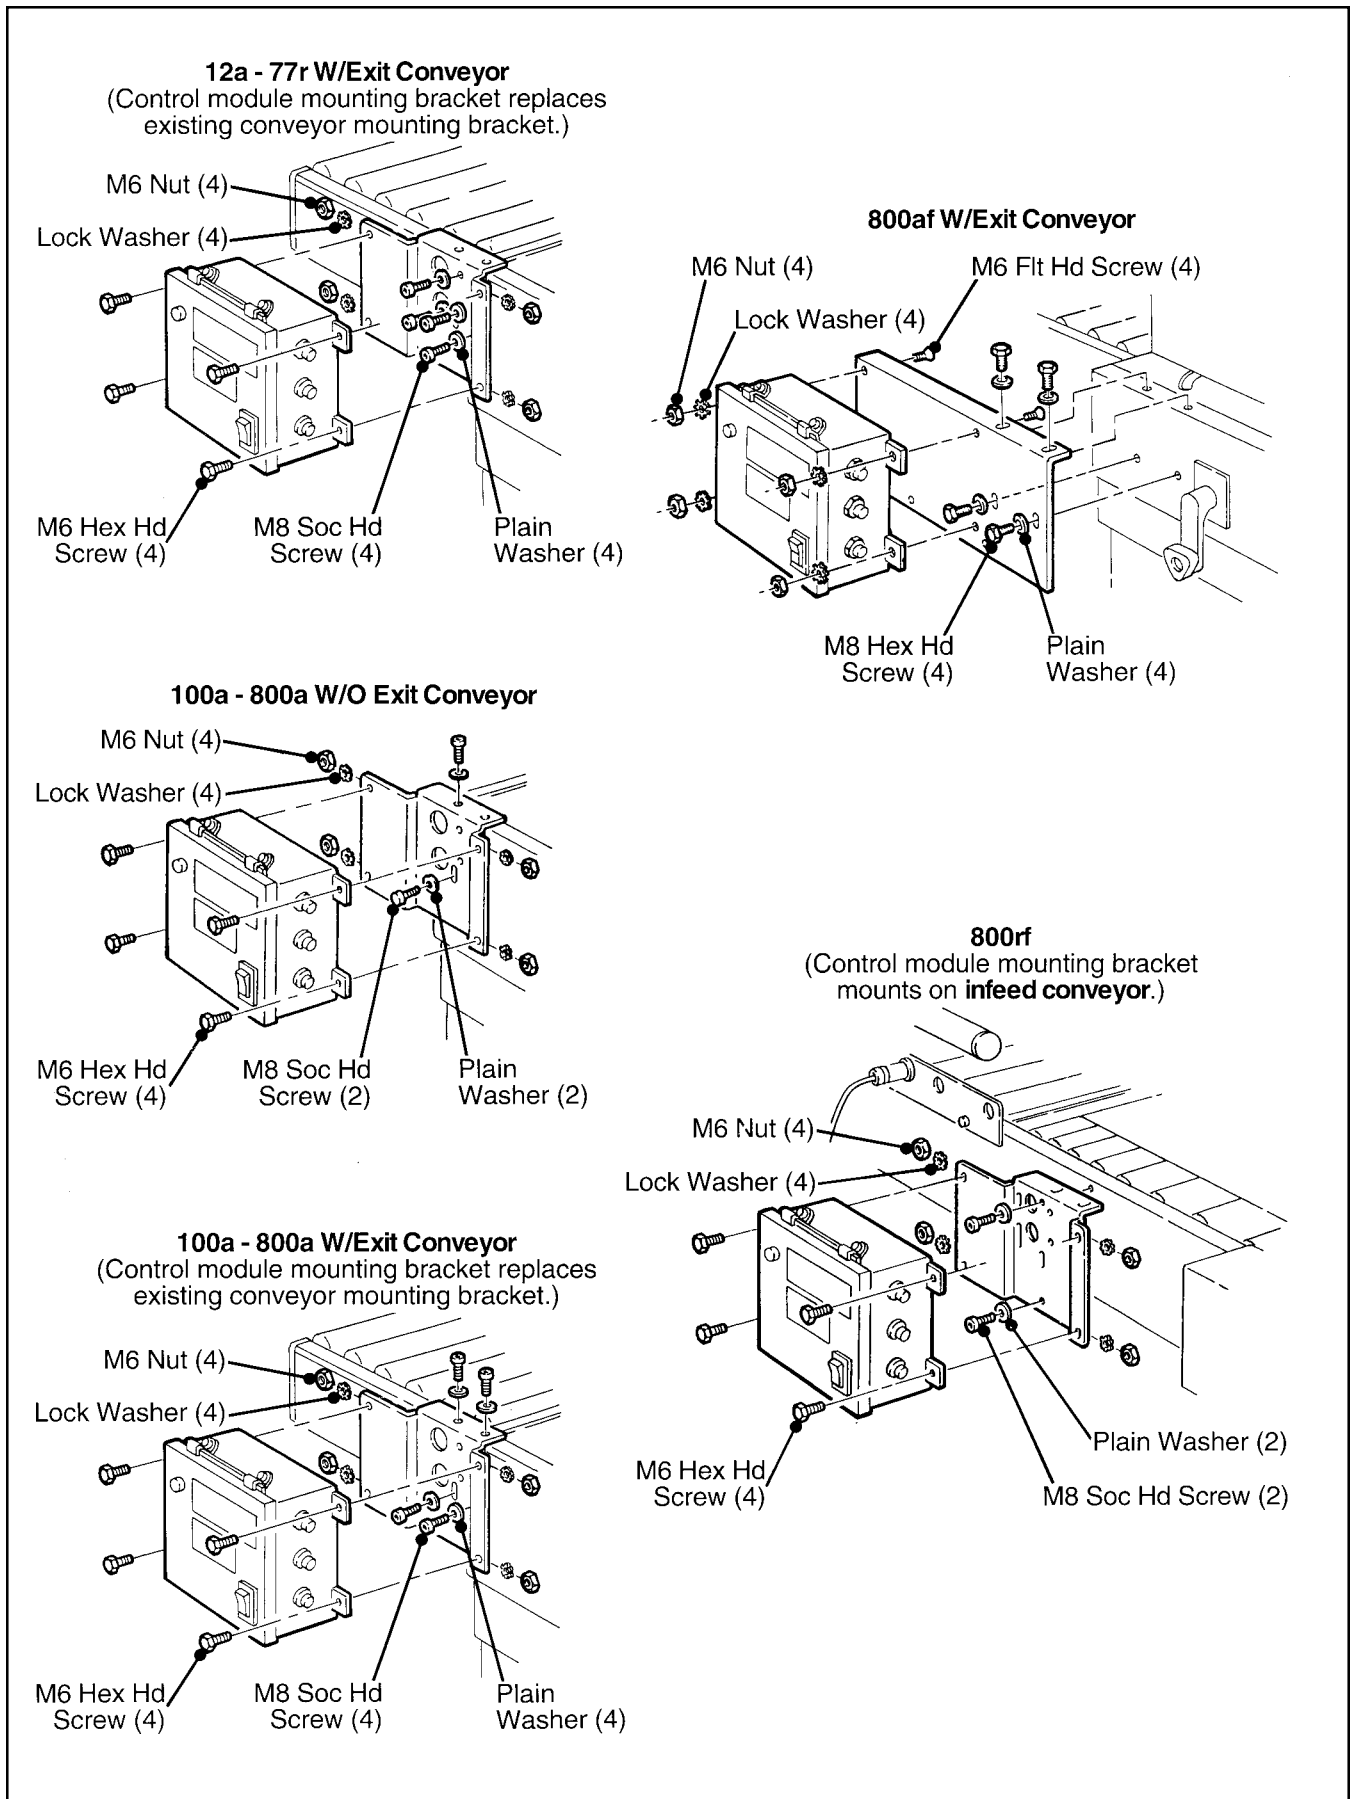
Control Module Mounting With Universal Mounting Brackets
